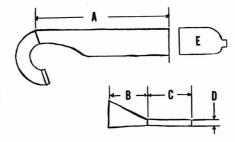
Performance of F6 Enduro models may be improved by modifying the standard exhaust pipe.
